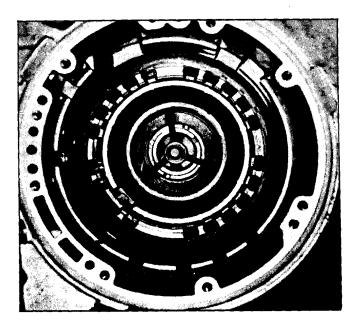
G-148 Compressing Low and Reverse Clutch Piston
